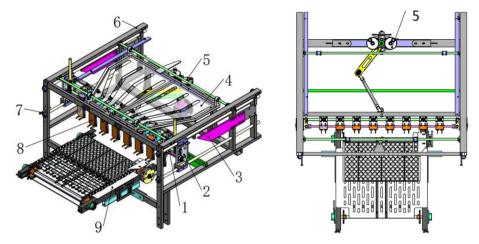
Three-dimensional model of the automatic seedling picking system. 1. lifting rod; 2. locking mechanism; 3. pressure plate; 4. seedling guide; 5. transmission mechanism; 6. Frame; 7. adjustable bolt; 8. Manipulator; 9. feeding mechanism.
